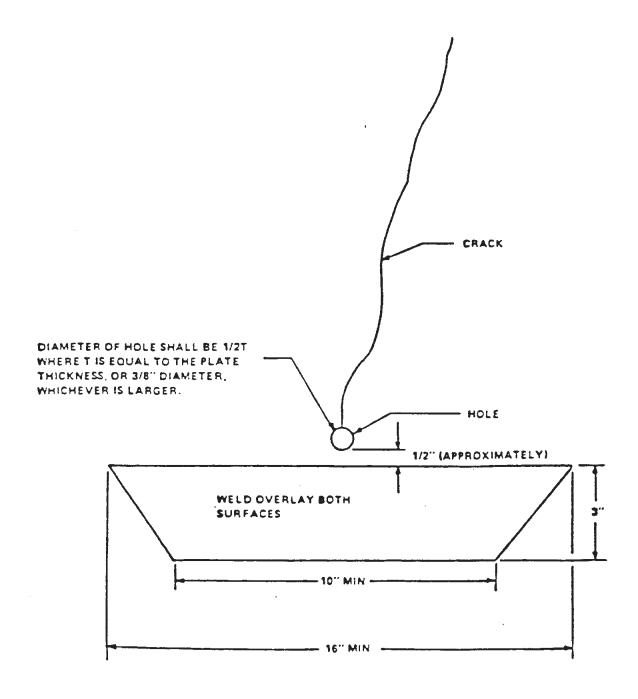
Ductile Metal Overlay To Arrest Cracks in Surface Ship Hull Structure
